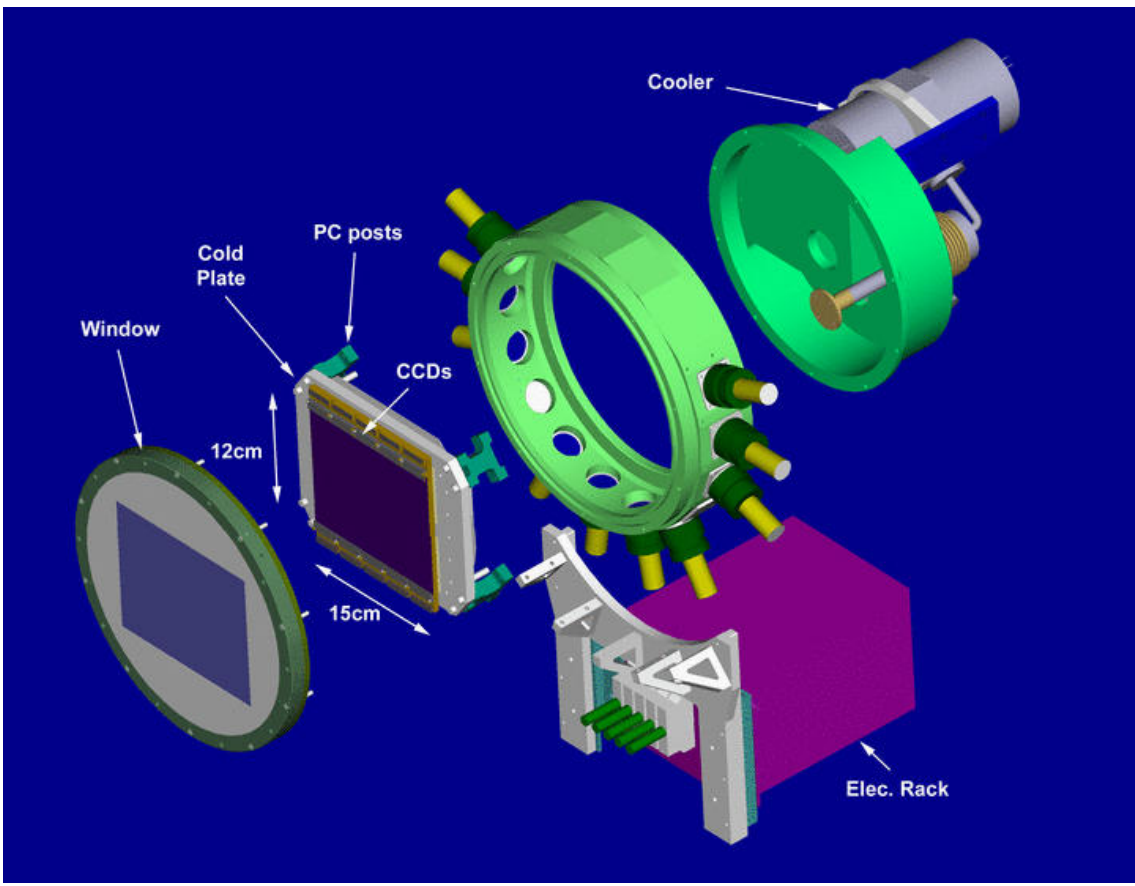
Exploded view of the vacuum dewar of Suprime-Cam.
